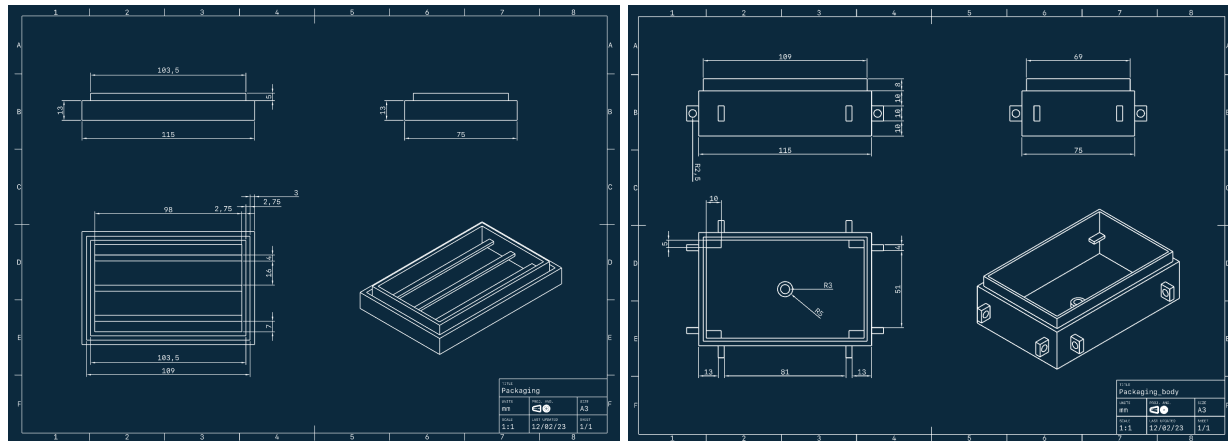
The housing engineering drawings (left: lid; right: body) showing top and side views.
